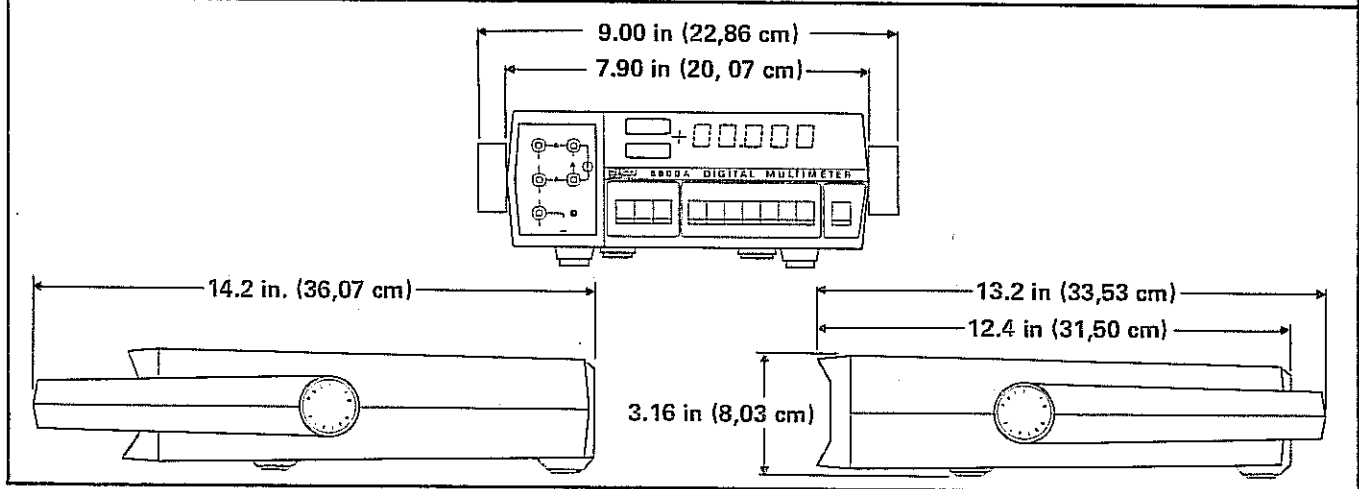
MODEL 8800A OUTLINE DRAWING
